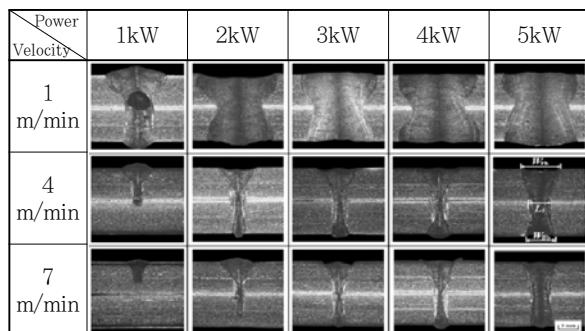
Cross section for different laser power and welding speed¹¹⁾
